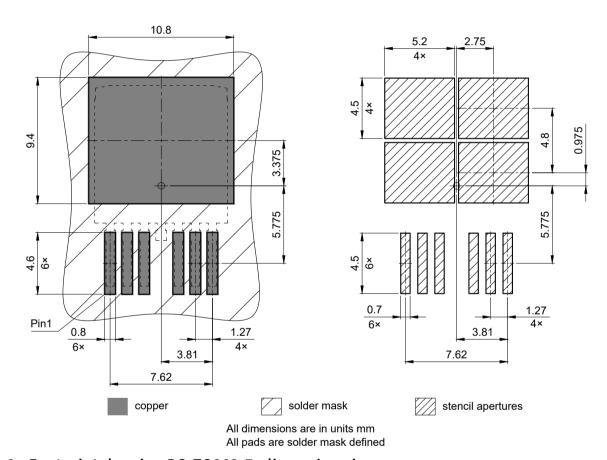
Footprint drawing PG-TO263-7, dimensions in mm
